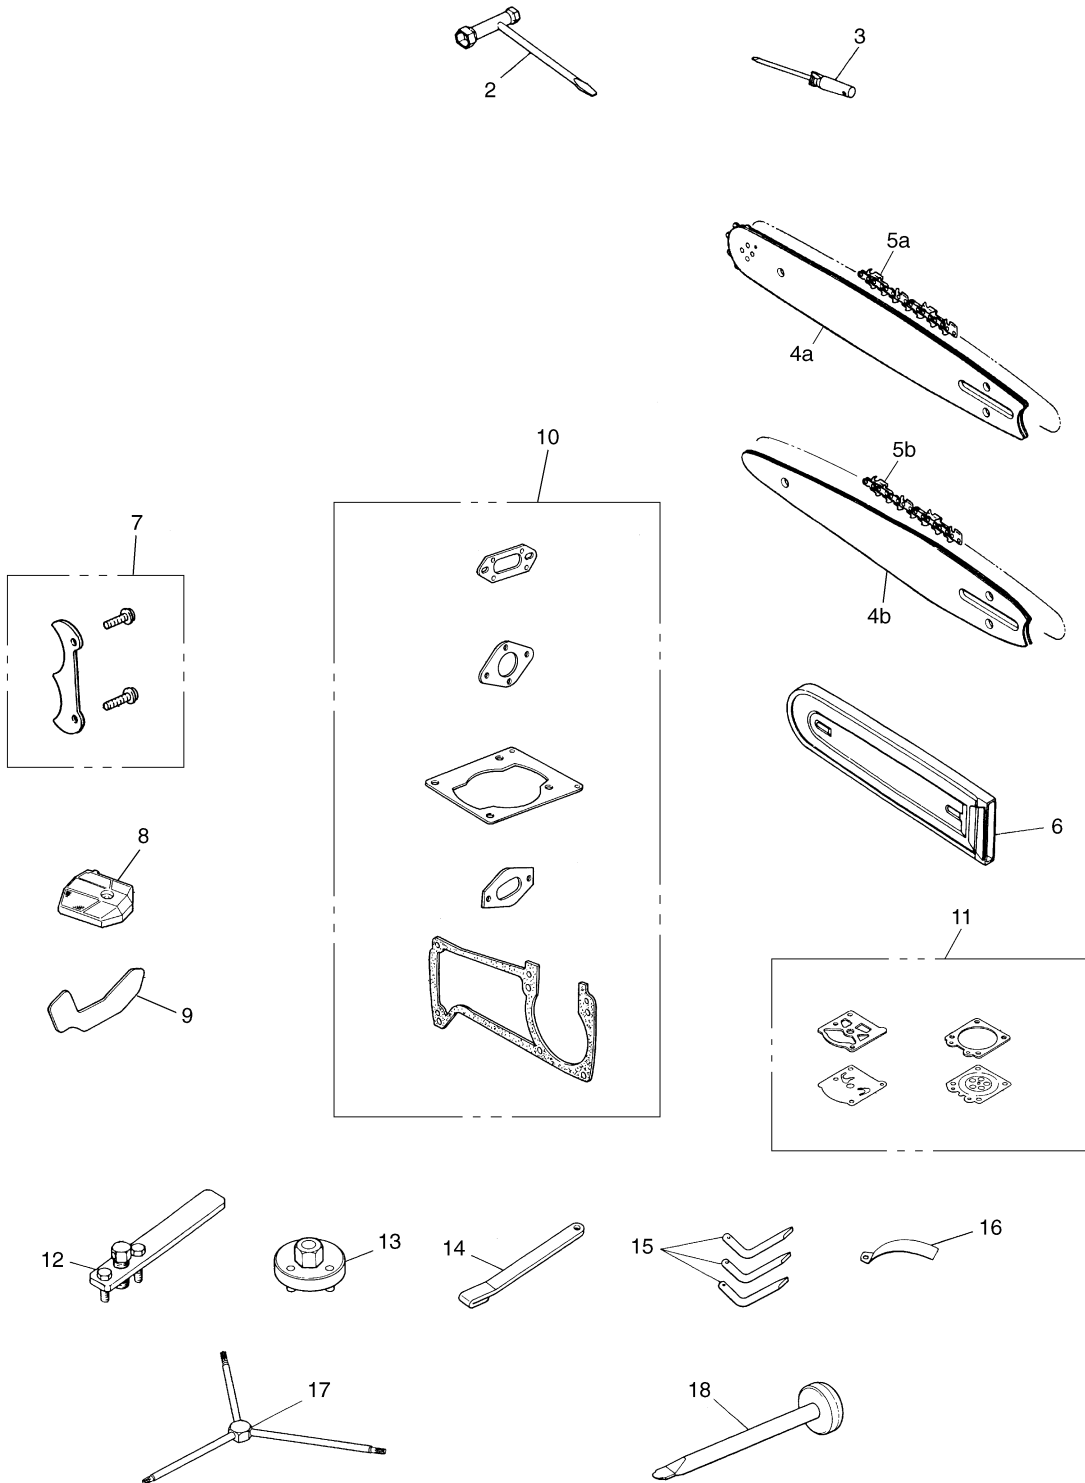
GUIDE BAR, SAW CHAIN, TOOLS
